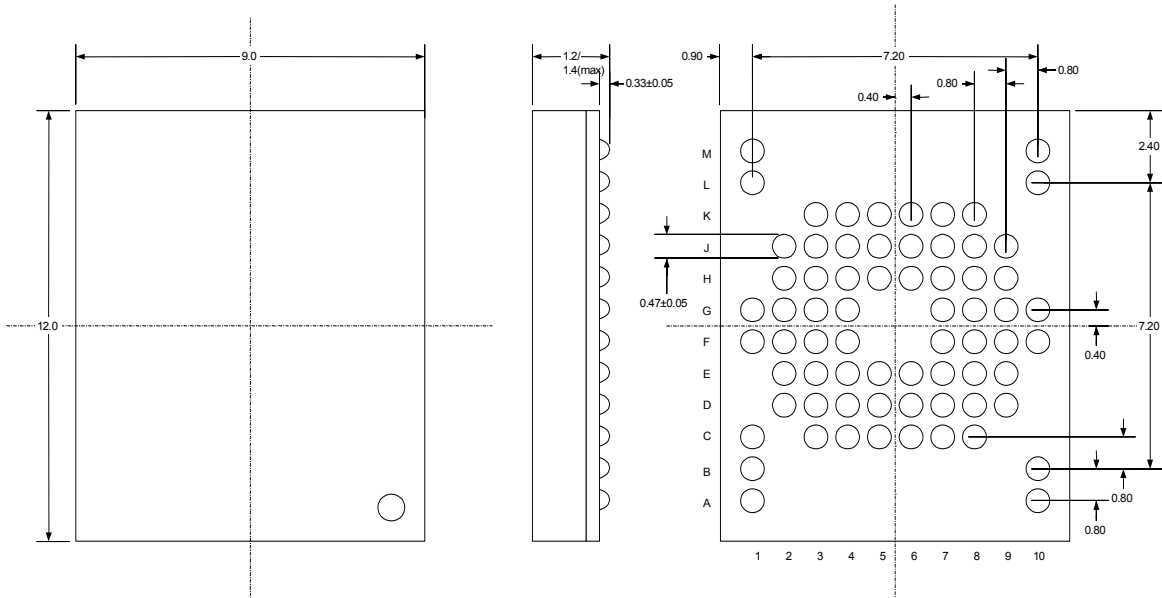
Mechanical Dimensions 9x12 FBGA Package
